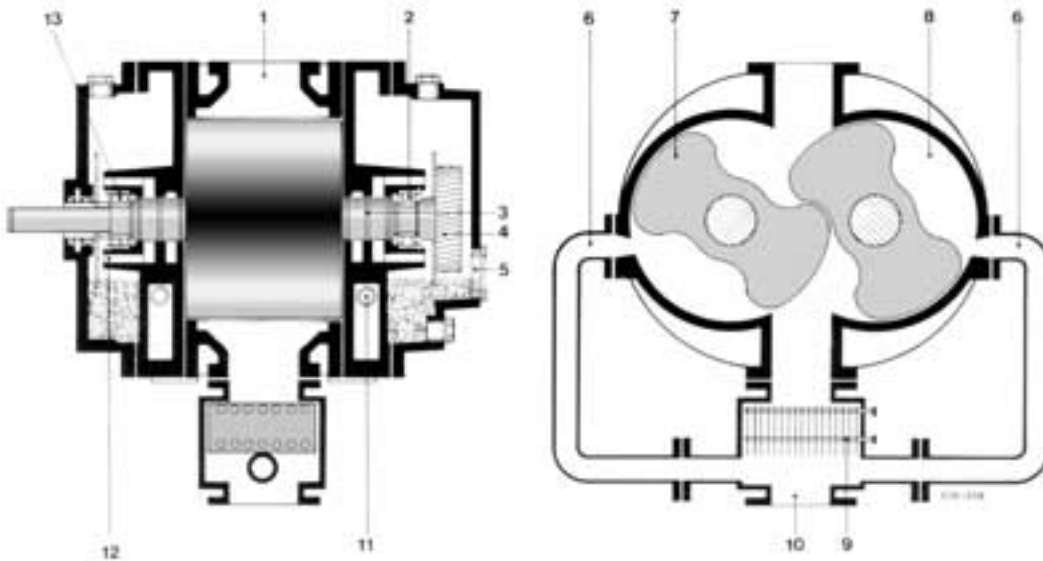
Sectional representation of a circulatory gas cooled Roots vacuum pump (WGK, Pfeiffer Vacuum GmbH).
